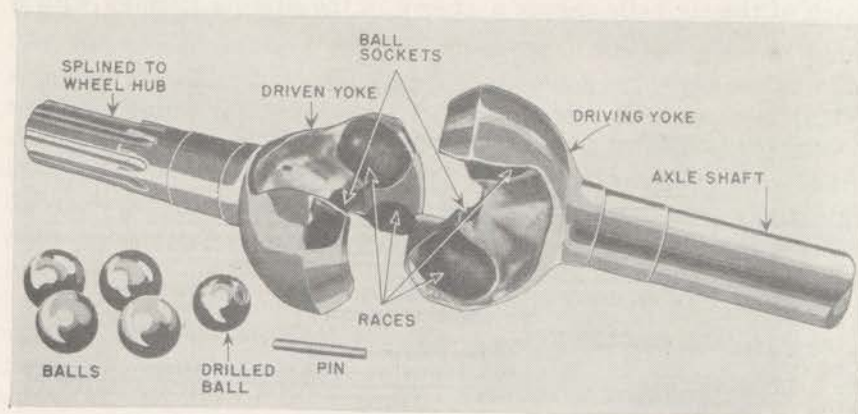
Bendix-Weiss type of constant velocity universal joint unassembled.
